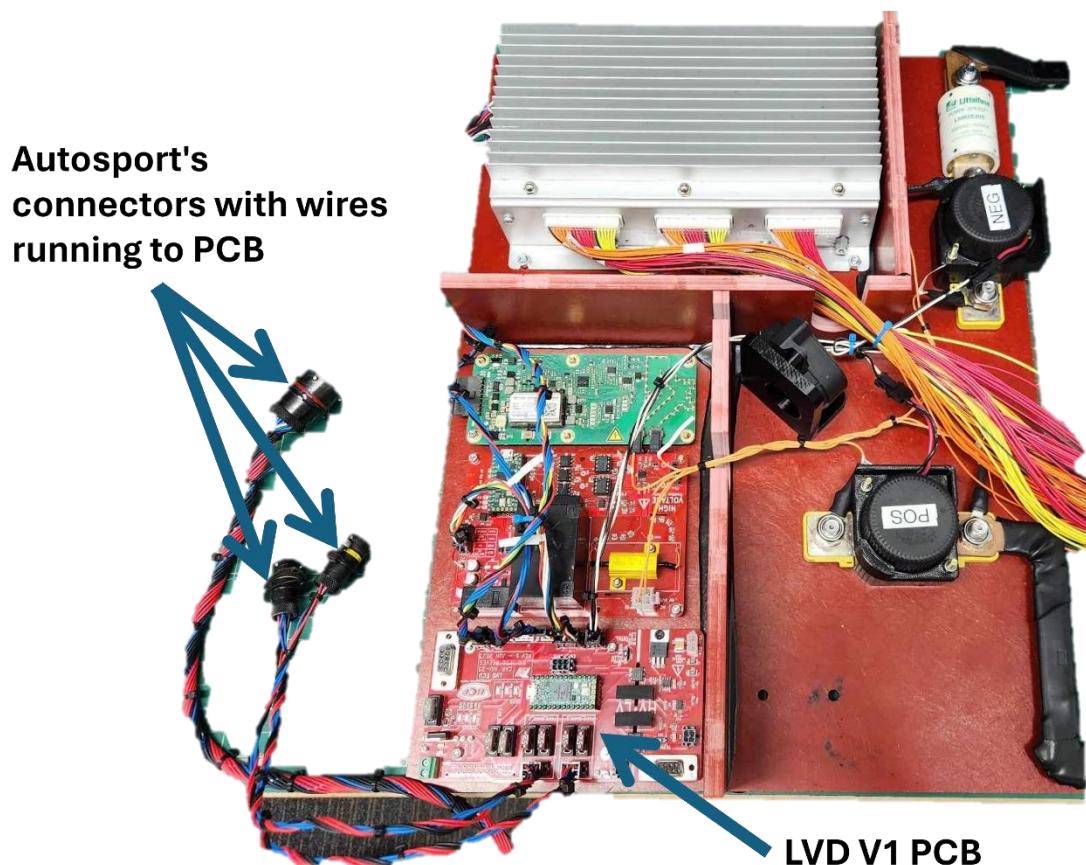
LVD V1 assembled on top plate (Autosport's connectors wired to board)
